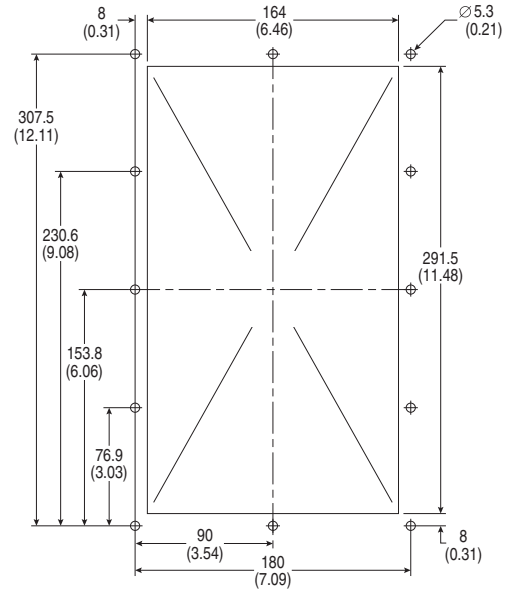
PowerFlex 400 Frame C Flange Mount Drive
